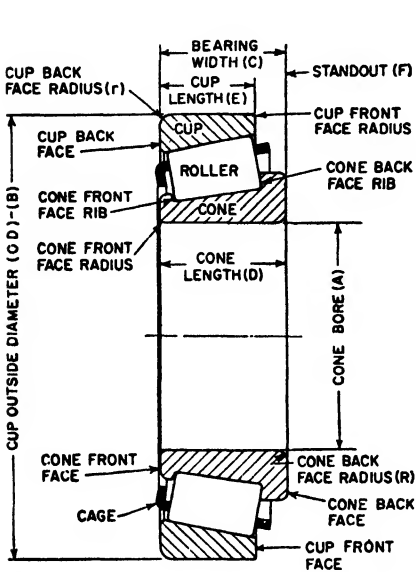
The various parts of a tapered roller bearing. (Timken Roller Bearing Company.)
